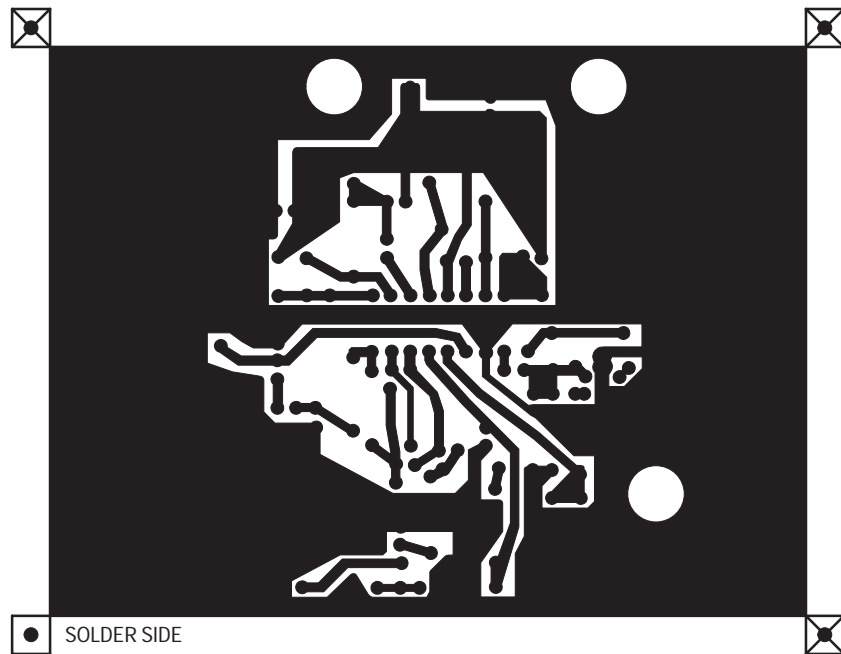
MC3372P PC Board Circuit or Solder Side as Viewed through Component Side
